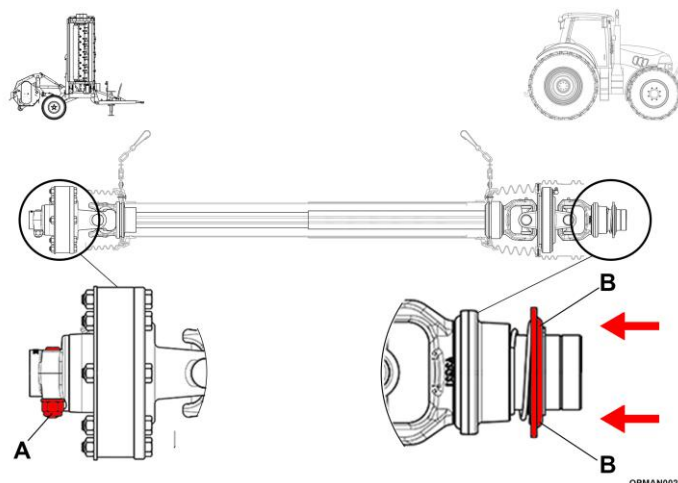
Trident Input Driveshaft Fitting & Removal
